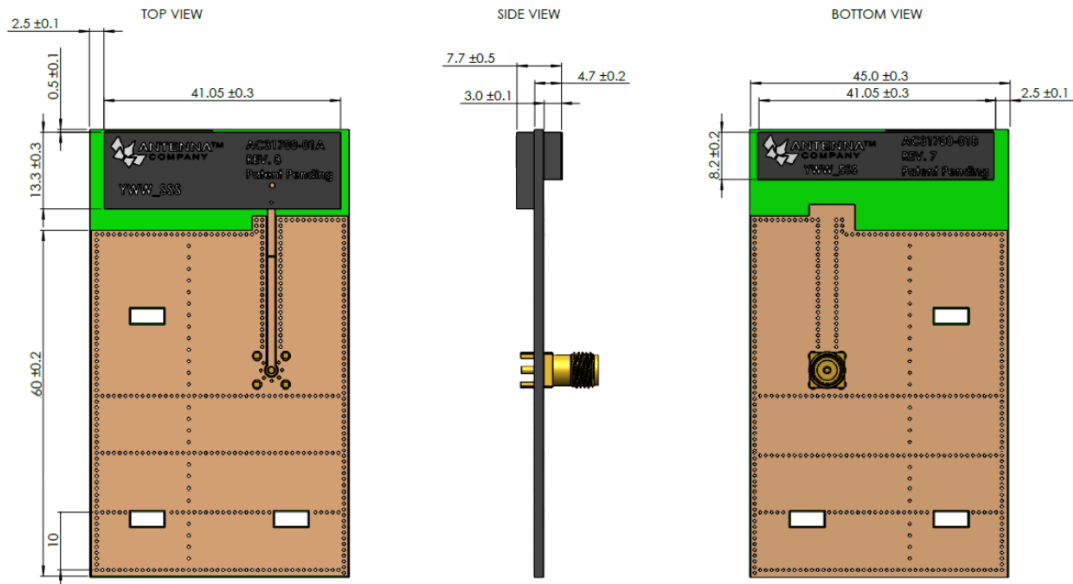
Illustration of the AC31700-01A integration on the top-, side- and bottom-surface of the host PCB
